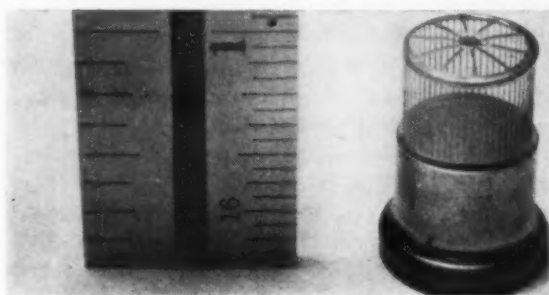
Completed one-piece copper grid electrode. The 0.005-in. wires are formed integrally with thicker end supports. Accurate jiggling cylinder is also formed.
